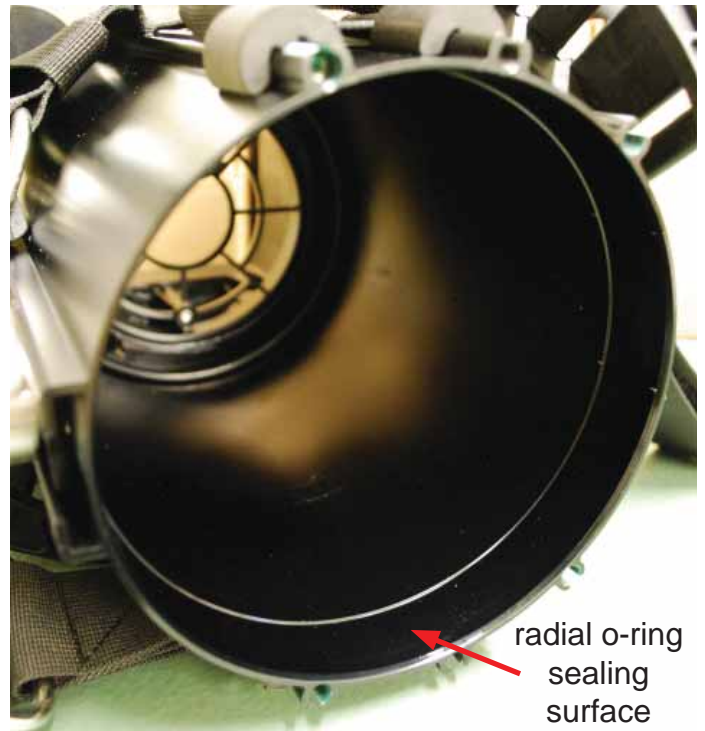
Inspect and lubricate canister housing end cap radial sealing surface
